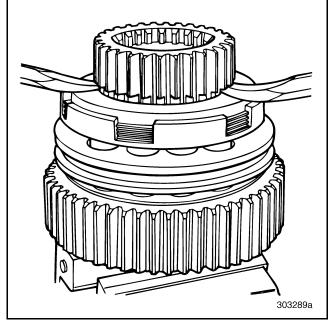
Removing Hi-Range/Hi-Split Gear and Ball Bearing (T313L/T318L Shown)
